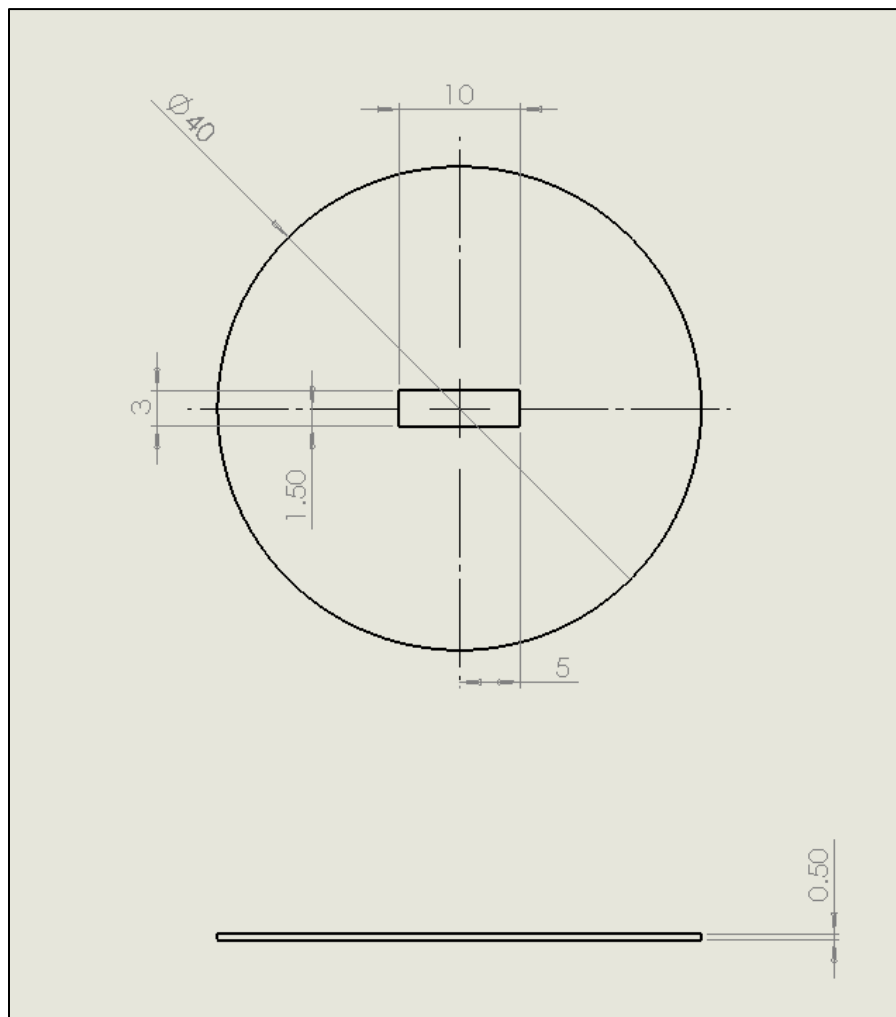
Engineering drawing of laser cut bottom gasket with dimensions of cut displayed
